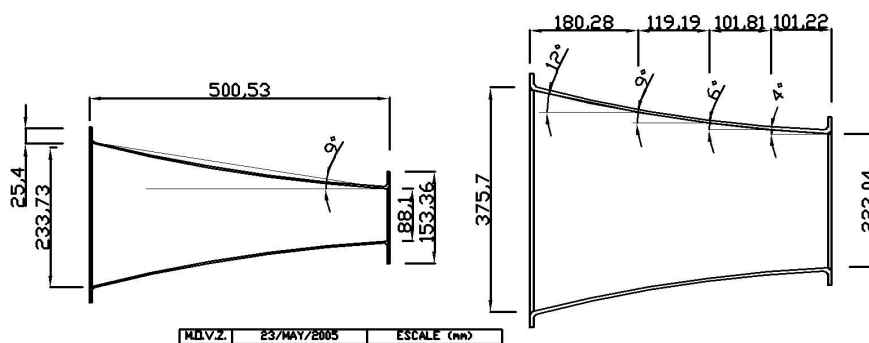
Diagram of inlet section from the wind tunnel. Lateral View (left figure), Plan View (right figure).
